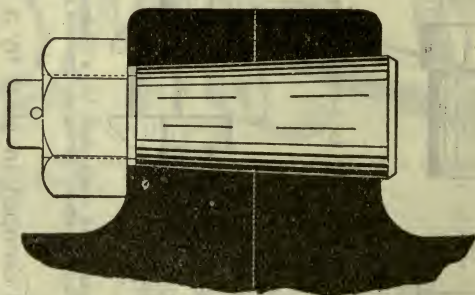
Taper flange bolts for connecting sections of large built up crank shafts. The absence of a hexagonal head improves the appearance of the joint.
